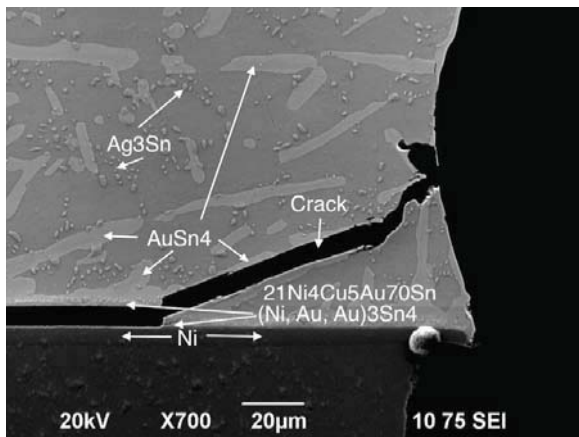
Fracture in the IMC near the board side, a TOPS component on a thick Au board, after thermal aging for 30 days.
